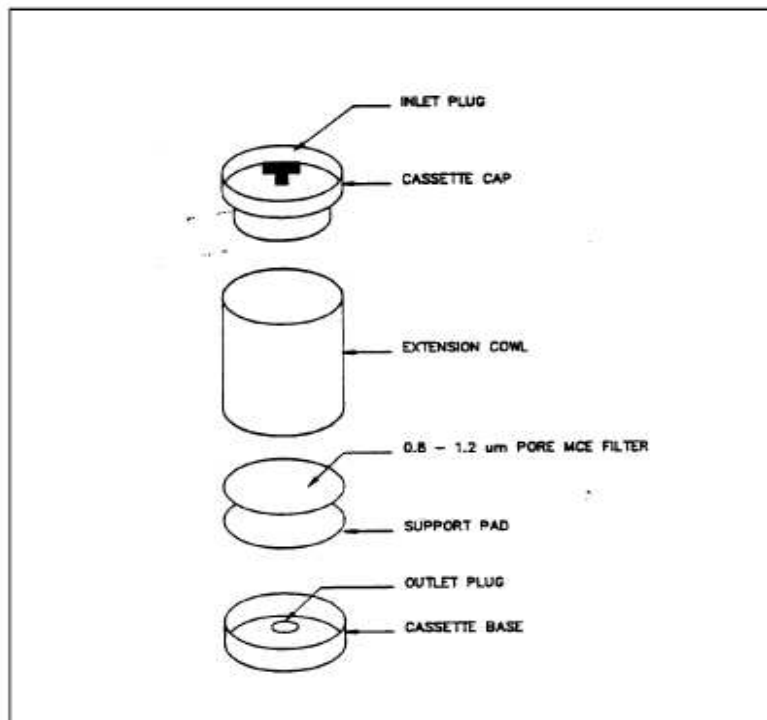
Exploded view of Phase Contract Microscopy Filter Cassette
